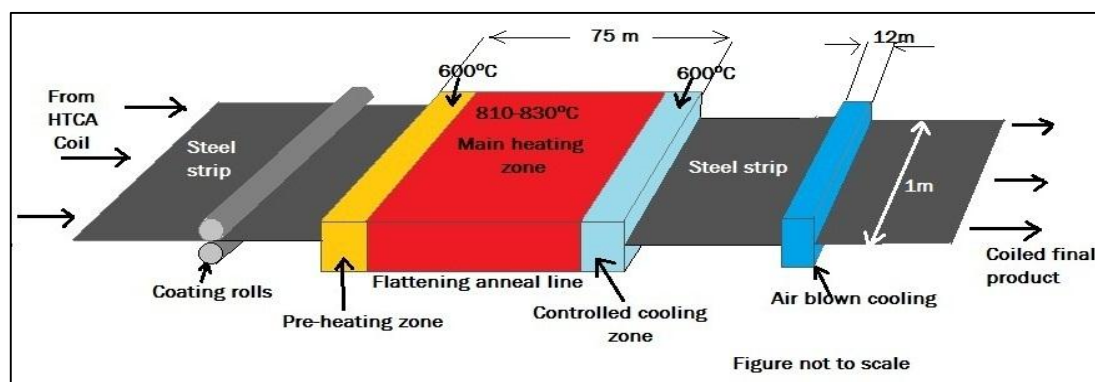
Schematic drawing of flattening anneal line showing coating rolls, heating and cooling zones
